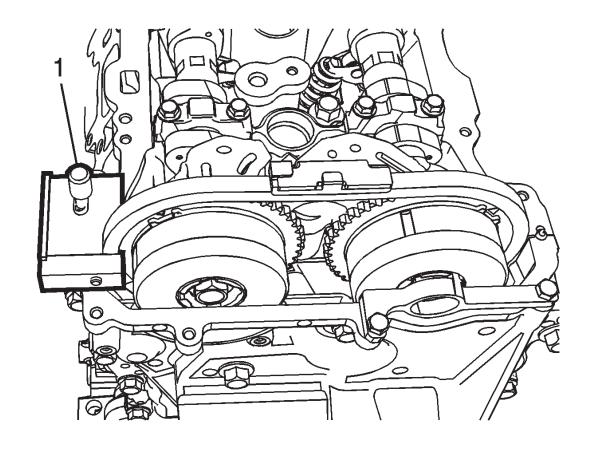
Identifying Timing Chain Holding Tool Courtesy of GENERAL MOTORS COMPANY
